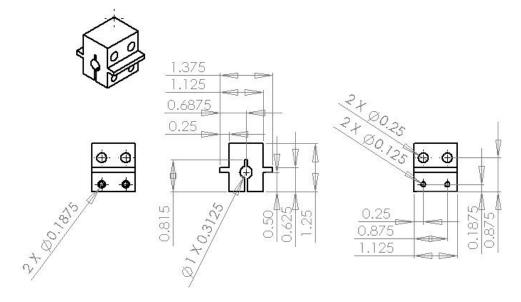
Wrist Joint Left Arm – Eng. Drawing
